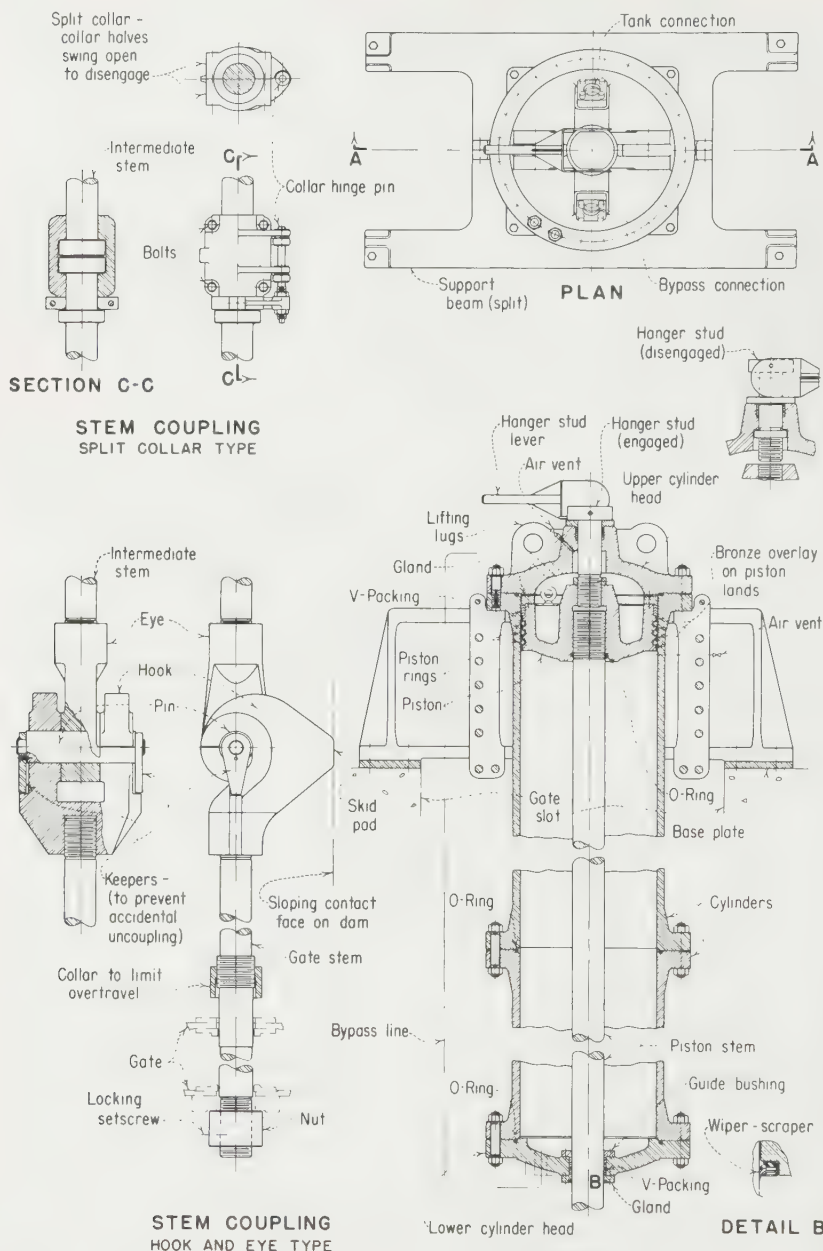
Typical arrangement and details of hydraulic hoist and stems for large intake gates.
